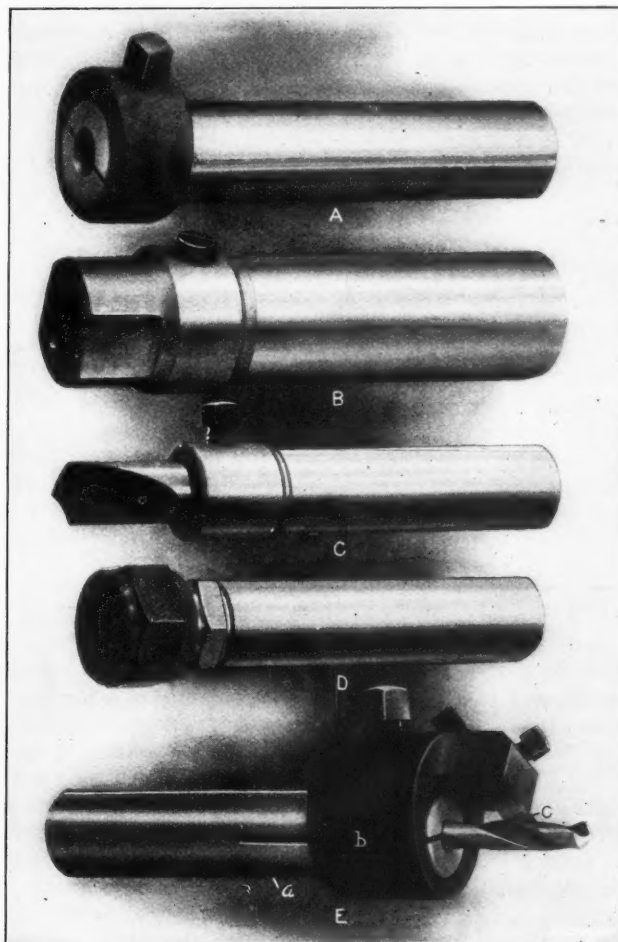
Standard Drill, Reamer and Centering Tool-holders
